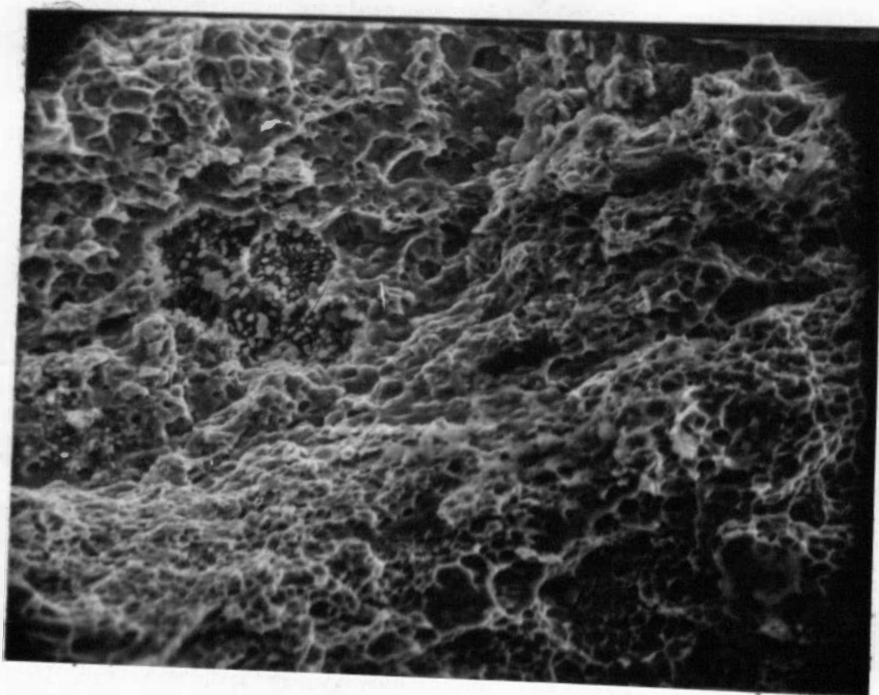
SEM Fractograph of 0.232 Inch Specimen. Area Shows the Chevron Shaped Fracture Arrest Zone Which Consists of Ductile Dimples. Mag.: 1700X.
